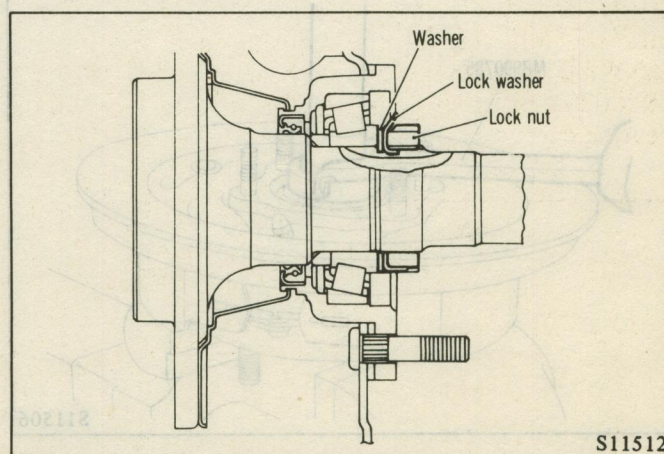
Installing the Washer, Lock Washer and Lock Nut
